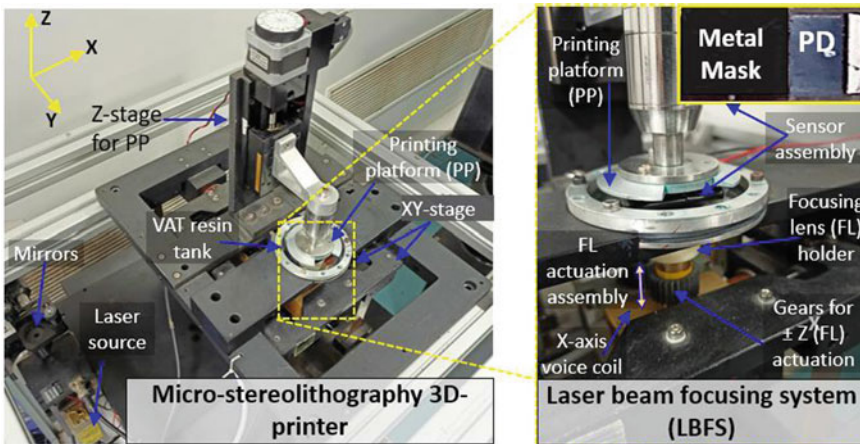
Photographic view of micro-stereolithography 3D printer and magnified picture of printing assembly followed by laser beam focusing system (LBFS)
